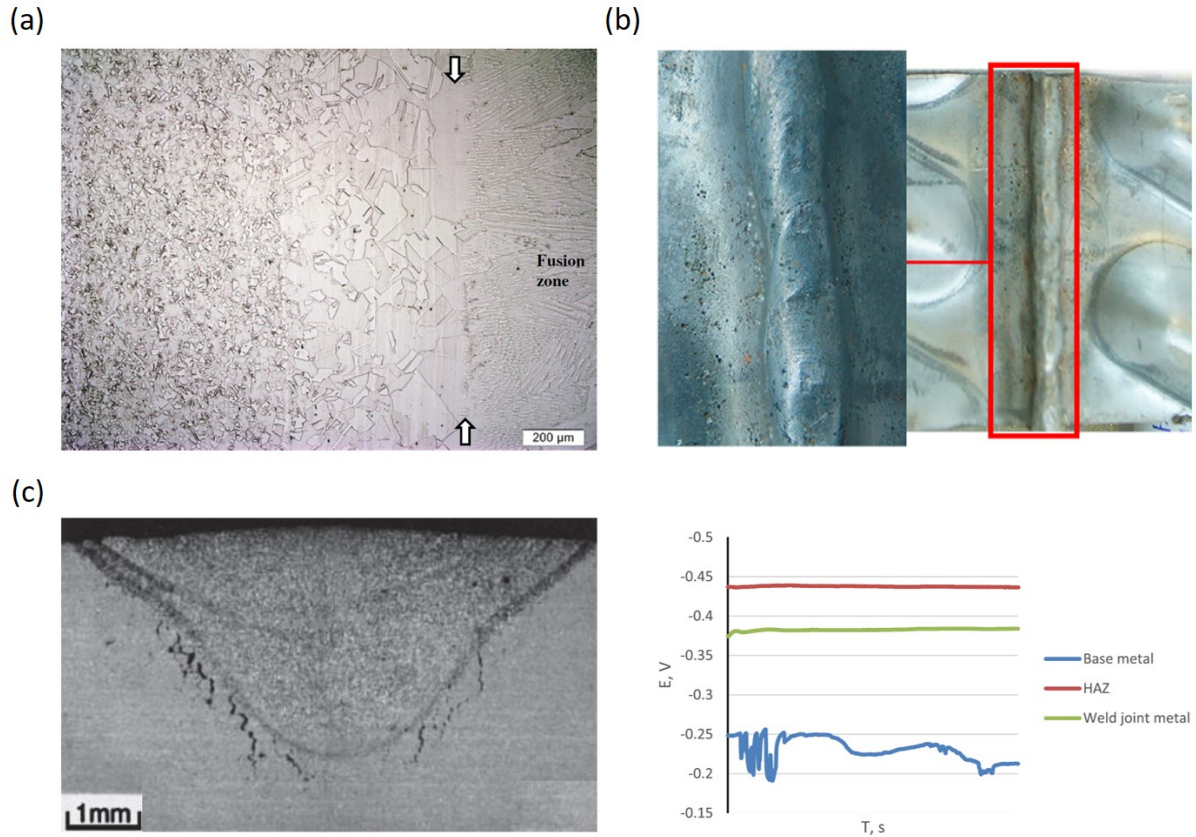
(a) HAZ in fine-grained austenitic stainless steel after GTAW process [24], (b) pitting corrosion of the weld and corrosion potential of each area [26] and (c) cracking of the HAZ in irradiated stainless steel 316 after welding [27].
